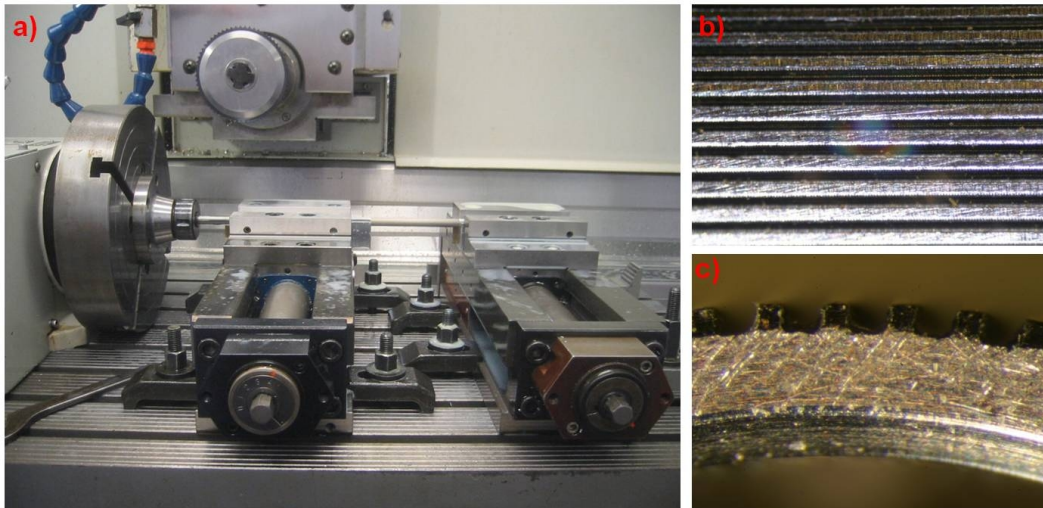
a) Micro-channel manufacturing on zircaloy tube in CNC machine; b) Top view on channel structure; c) Cross sectional view on channel structure
